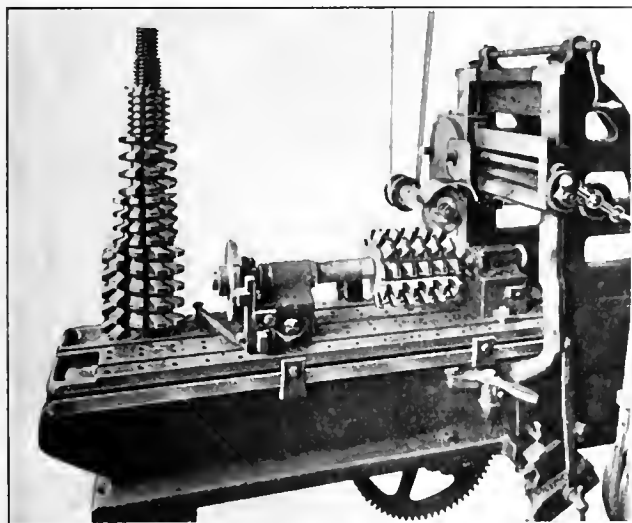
Simple Planer Attachment for Sharpening Hobs.
